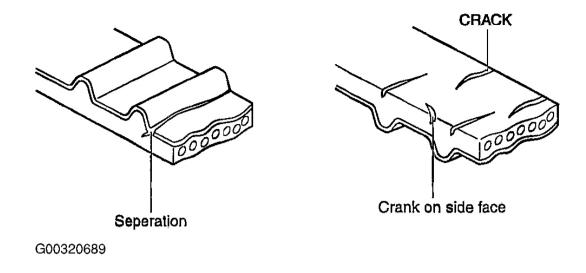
Testing Timing Belt For Cracks Courtesy of KIA MOTORS AMERICA, INC.
